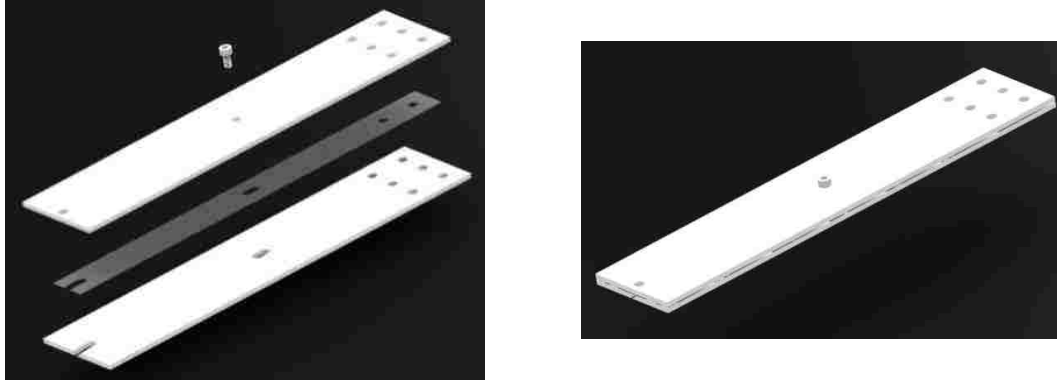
Assembly View and Exploded View for the Test Specimen Designed for Test 1 [54]
